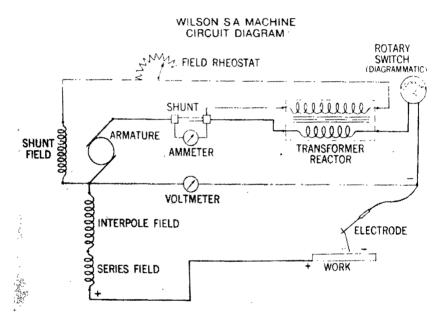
A D.C. arc welding circuit wiring diagram: Wilson SA (Courtesy of: Air Reduction Sales Company)
